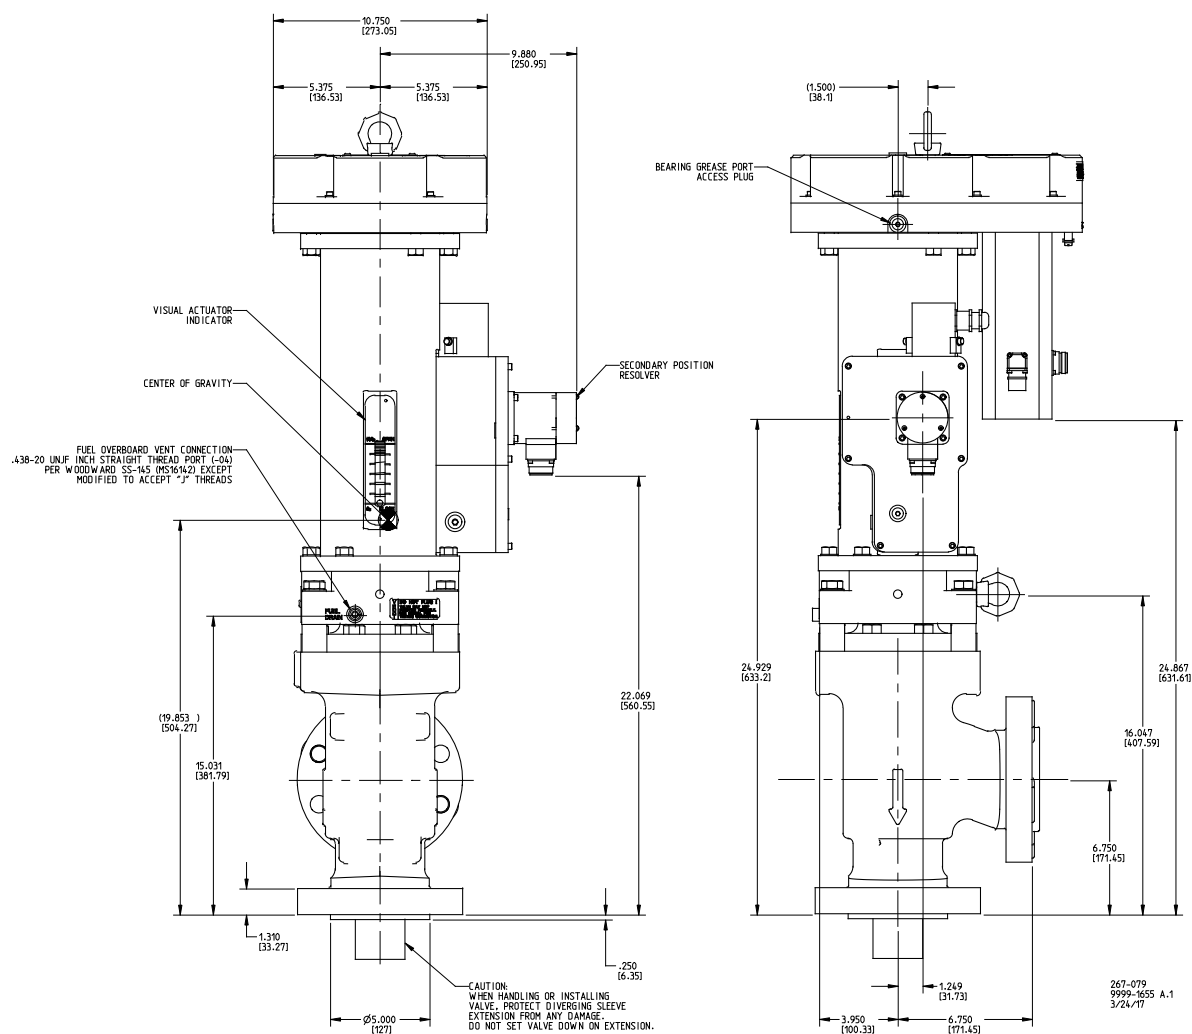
Outline Drawing (3-Inch HR LESV)
